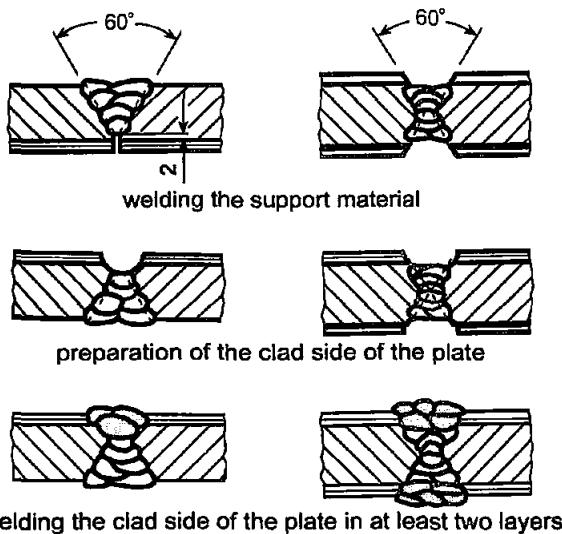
Weld shapes for welding of clad plates
